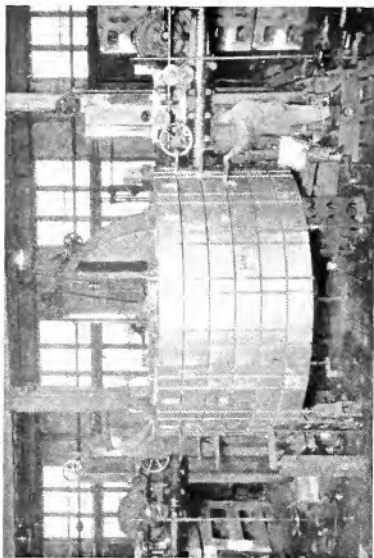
Milling Machines Cutting Dovetail Slots for Poles at Diametrically Opposite Points on Rotor of 32,500-kv.-a. Waterwheel-driven Generator
